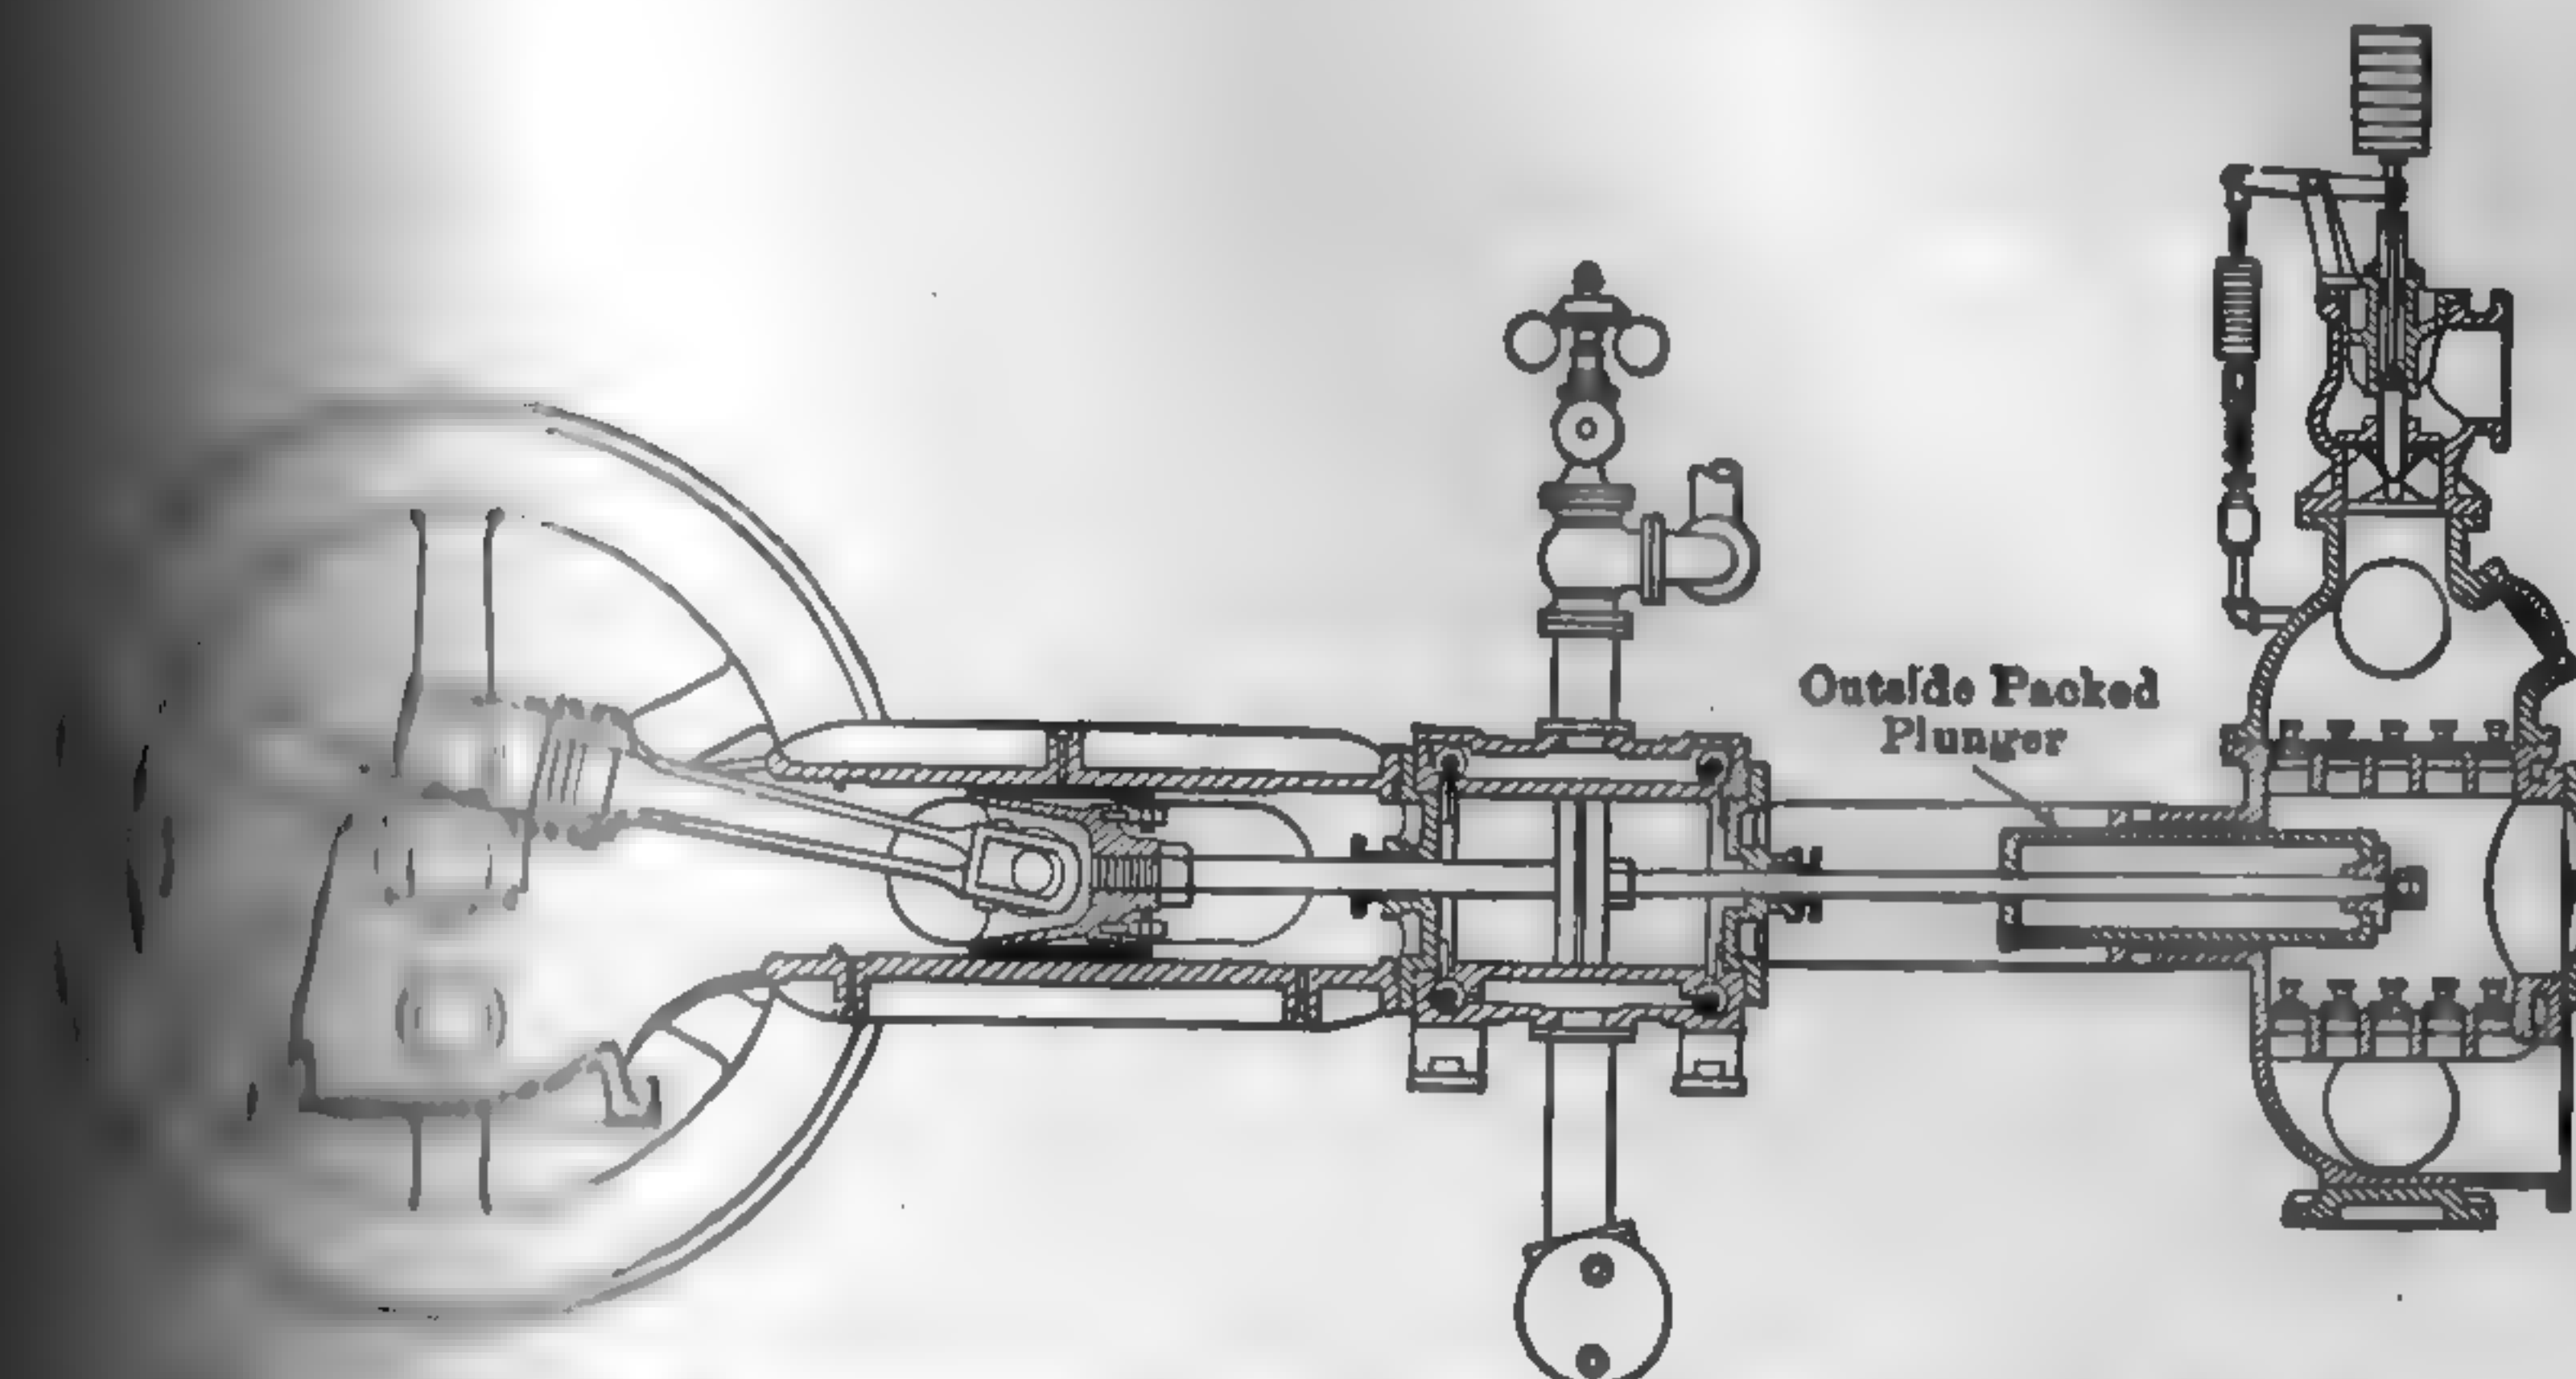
Horizontal Flywheel Pump with Outside-packed Plunger.
